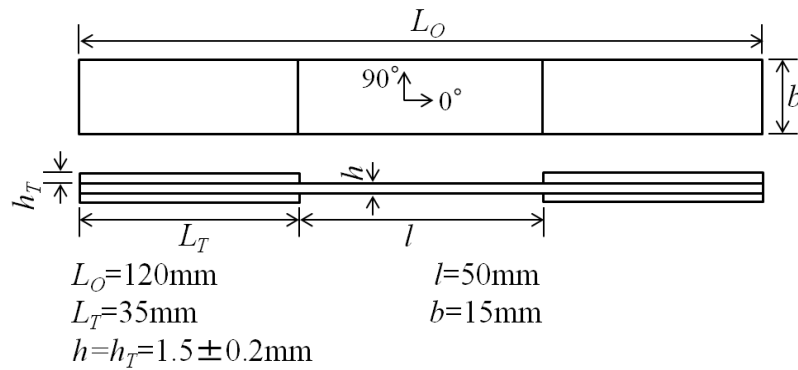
Schematic showing the dimensions of the bending test specimens.
